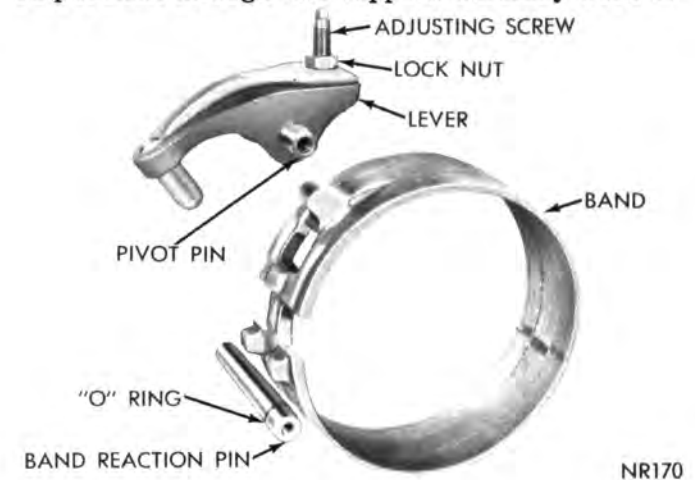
Double Wrap Band and Linkage—Disassembled (A-904-LA Transmission only)
